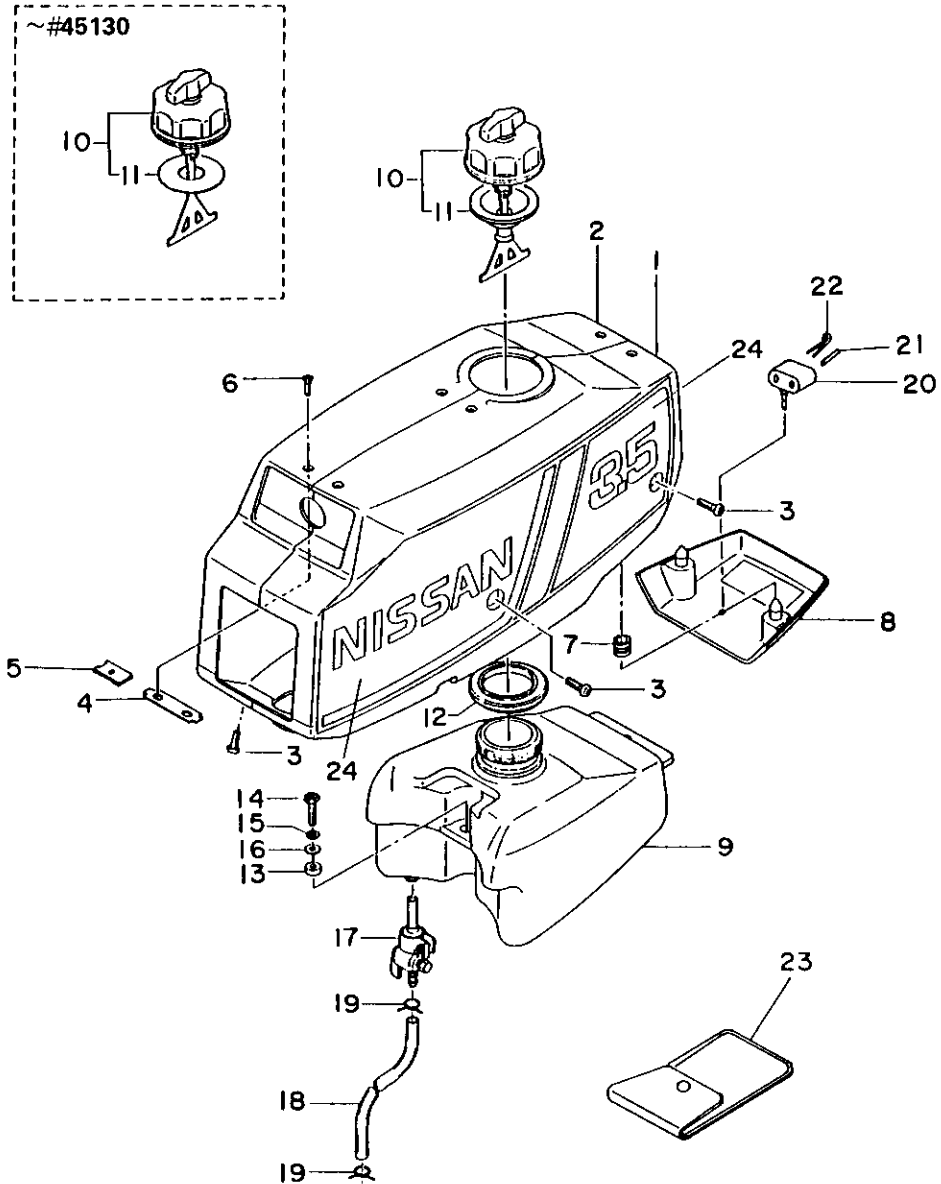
MOTOR COVER & INTEGRAL FUEL TANK
